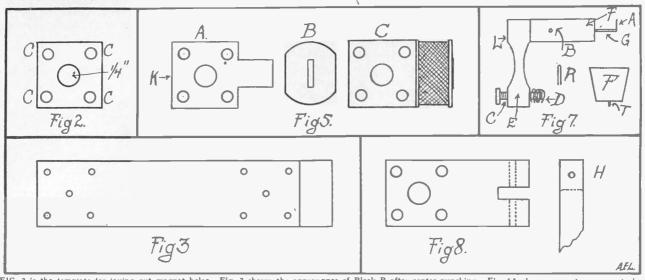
is the template for laying out magnet holes. Fig. 3 shows the appearance of Block B after center-punching. Fig. 5A shows magnet core exact size cut out of 1/16" soft iron or steel; B shows fibre washer of which two are made; C is the complete electro-magnet. Fig. 7 shows the details of the lever L, armature F and the connecting link R, all exact size. The lever should be chamfered so as to reduce weight. Spot B should be a shallow drill hole. Fig. 8 gives details of the machining to be done on one of the brass blocks O. It is full size and should be transferred to the block before any world is done.
